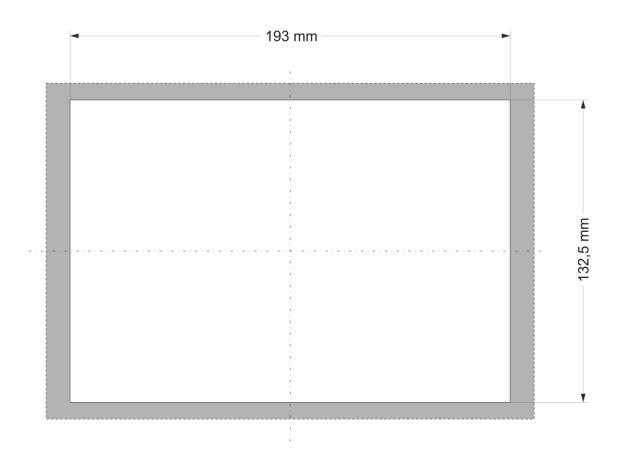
DC-Pi Prime Open 7 mounting cut-out
